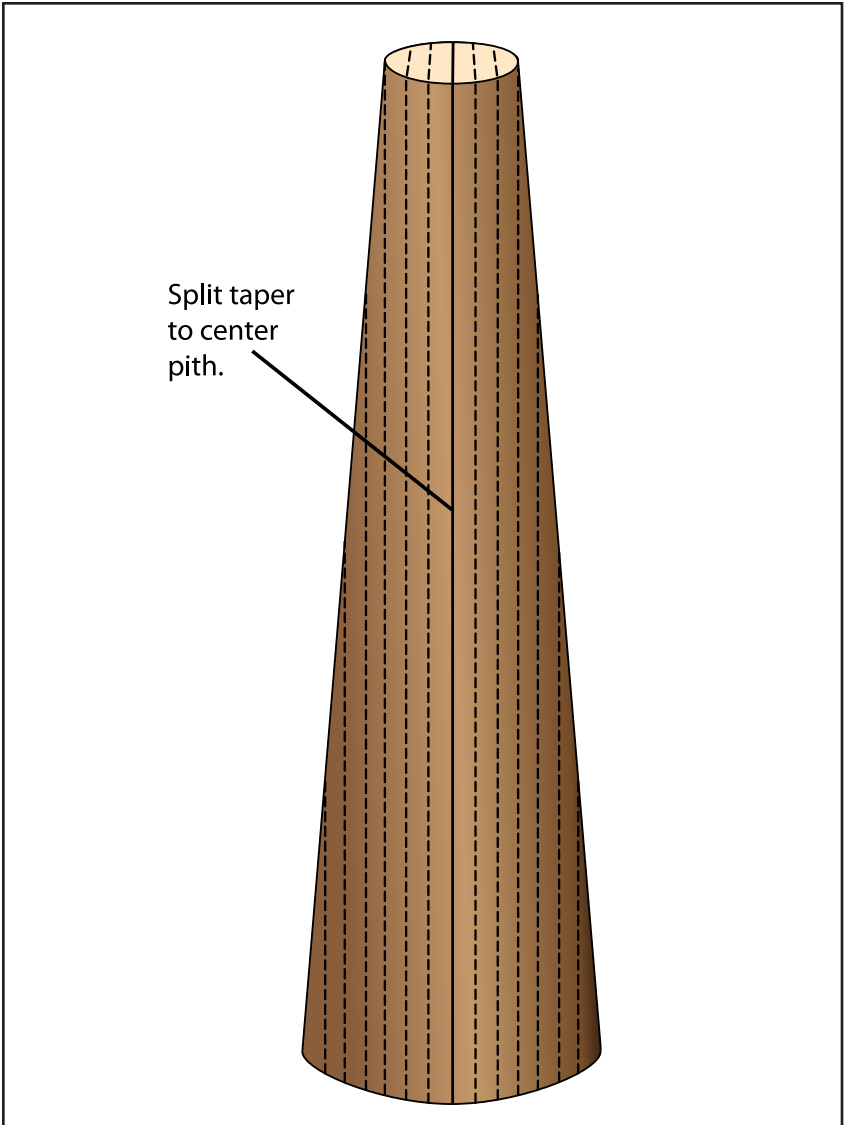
In split taper sawing the taper is divided and removed between opposite faces.
